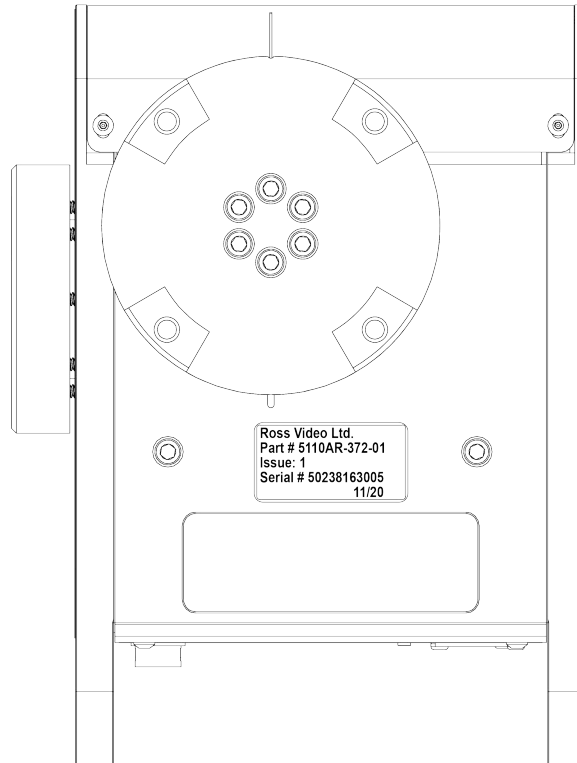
X300 Pan & Tilt Head (bottom view, camera cradle not shown)
